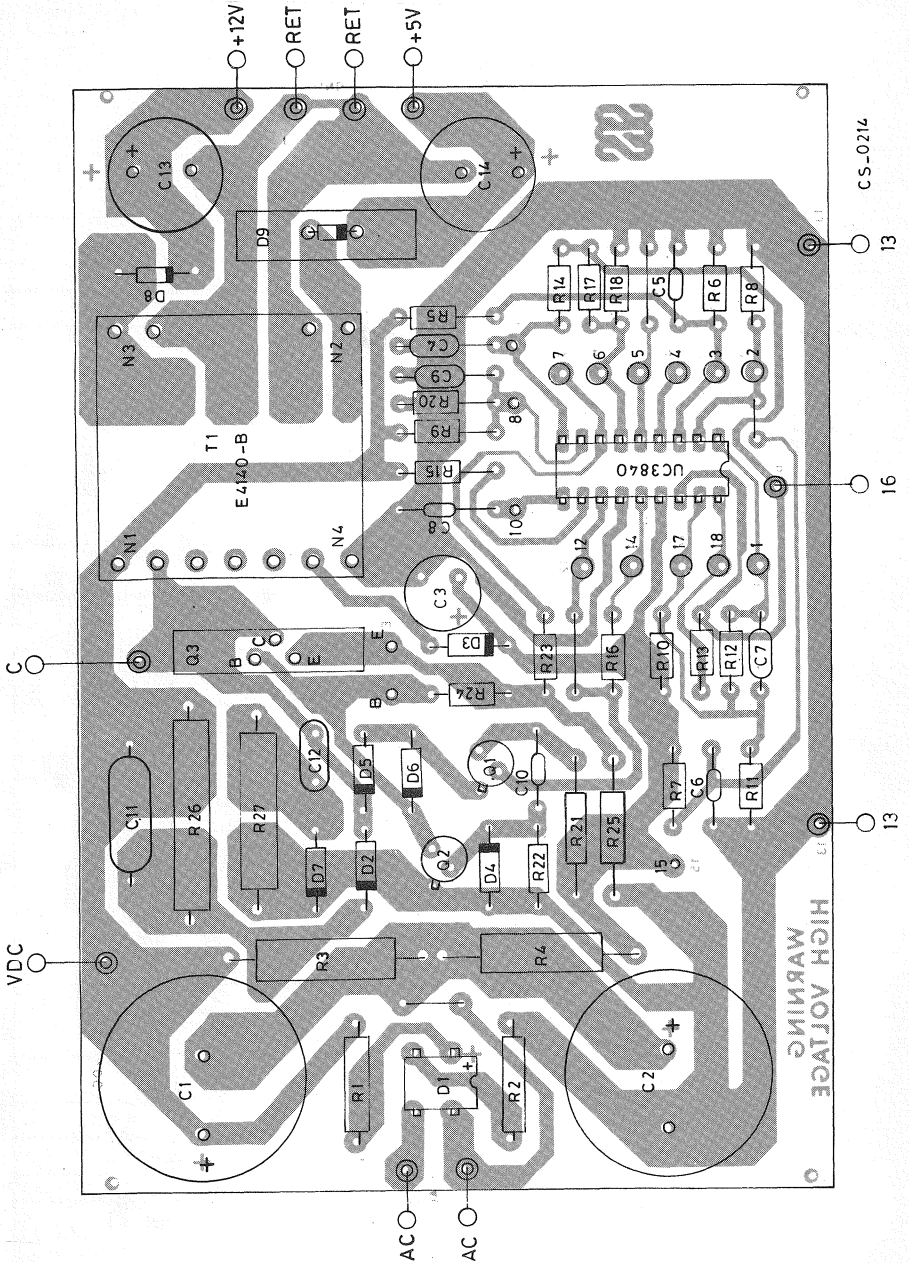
P.C. board components layout of the Fig. 4 (1 : 1 scale)
